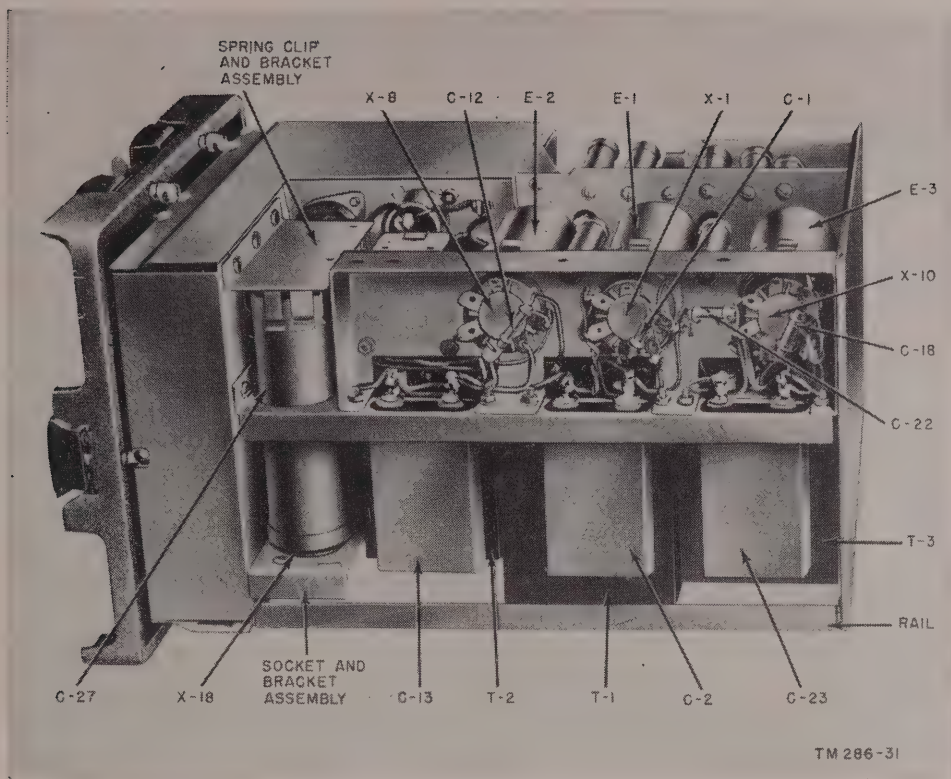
Power Supply PP-112/GR, bottom view of chassis.
